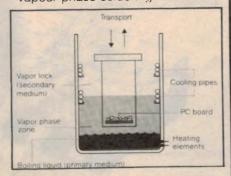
Vapour phase or reflows soldering uses a hot vapour to melt and make solder connections to surface mount devices. (Diagram by courtesy of Siemens.)
